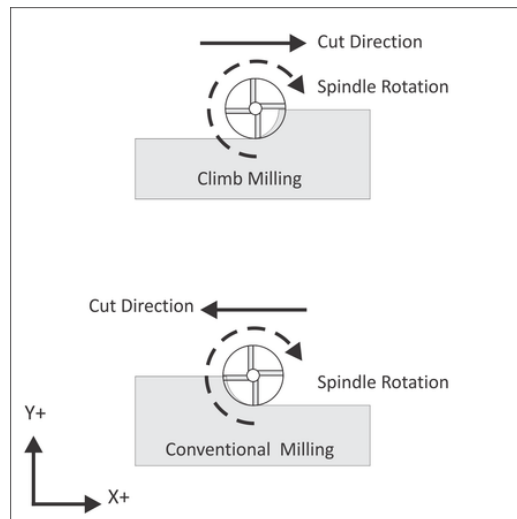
Different milling types. Climb milling is usually chosen for micro-milling but Conventional Milling is used for micro-milling as it minimizes mill deflections perpendicular to the direction of cut.
